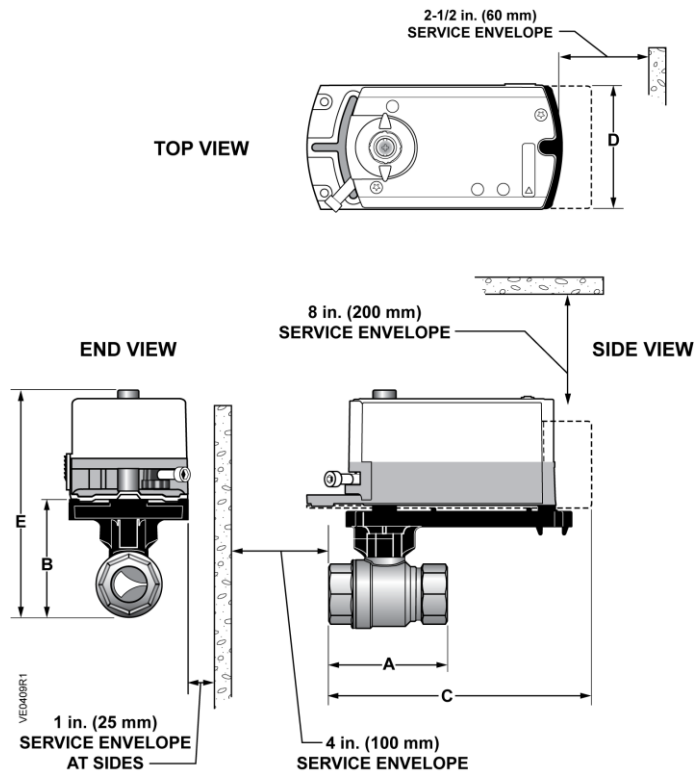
Two-Way Ball Valve and Low Profile Bracket with Actuator Dimensions in Inches (Millimeters).
